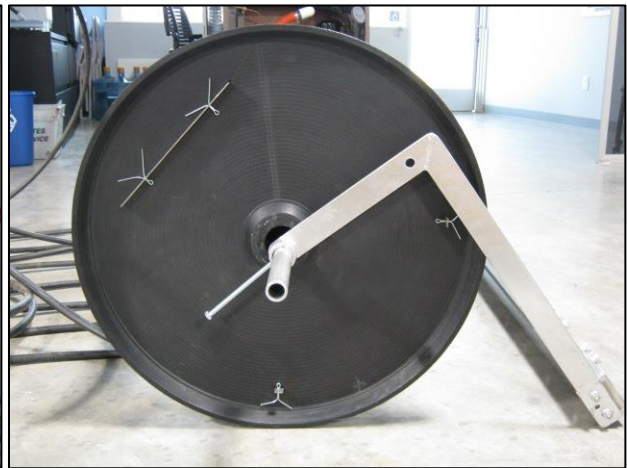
Spool is assembled with end plate and two spacer bars inserted into the two wheels and pinned with cotter pins.
